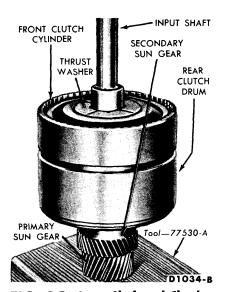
Input Shaft and Clutch Mounted in Holding Fixture
